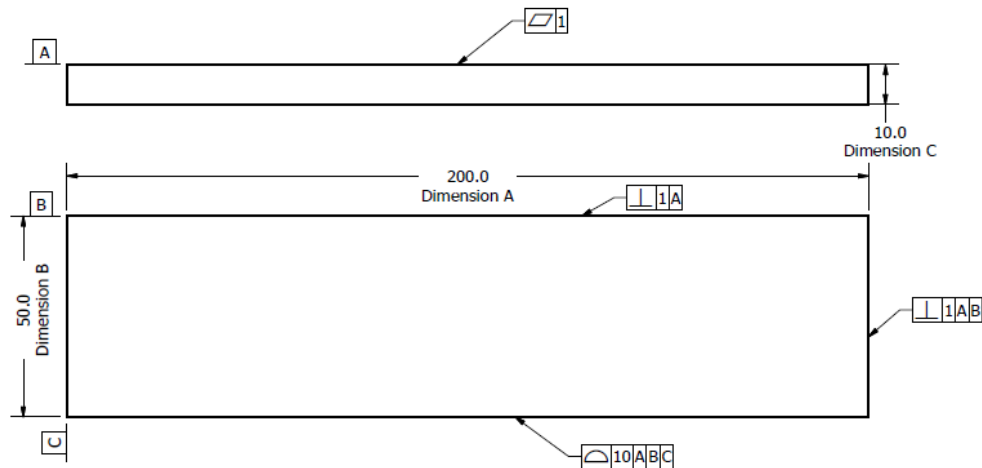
Block 1 with a flatness tolerance applied.
